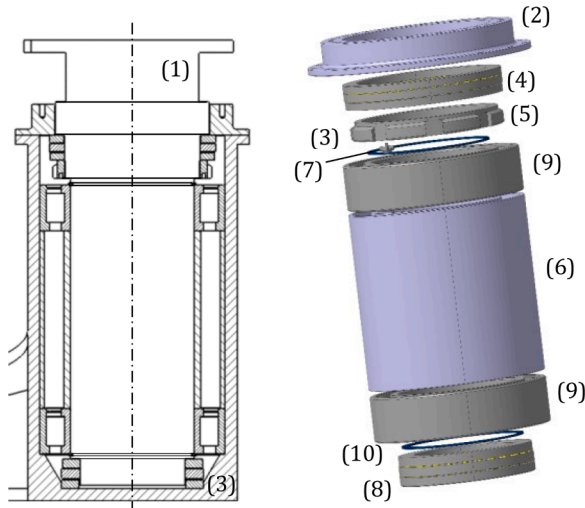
Bearings assembly drawings. Right: Exploded view bearings assembly.
